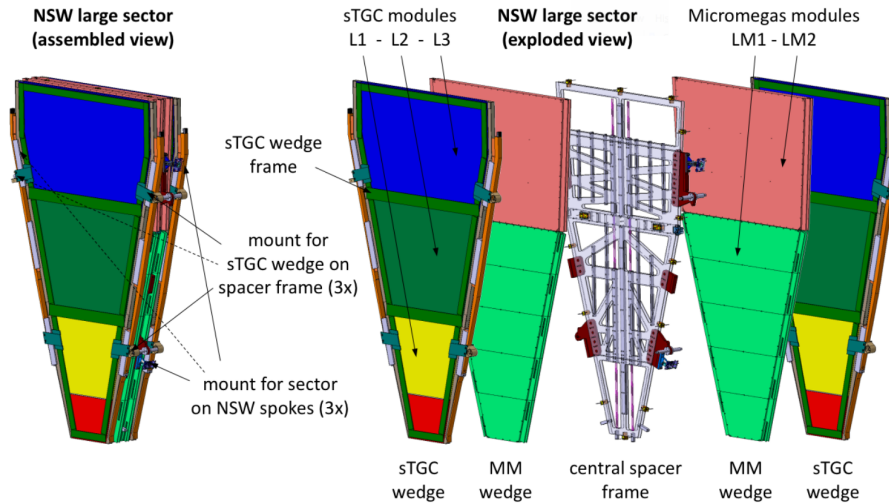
Drawing of one large NSW sector in assembled (left) and exploded view (right) [35].
